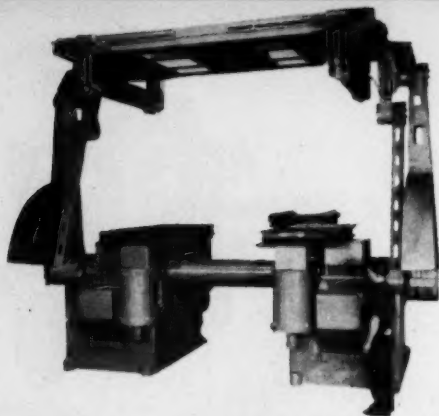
Mold jolt section of this machine is similar to jolting mechanism of machine illustrated in Fig. 7 but equipment is designed for larger molds.
